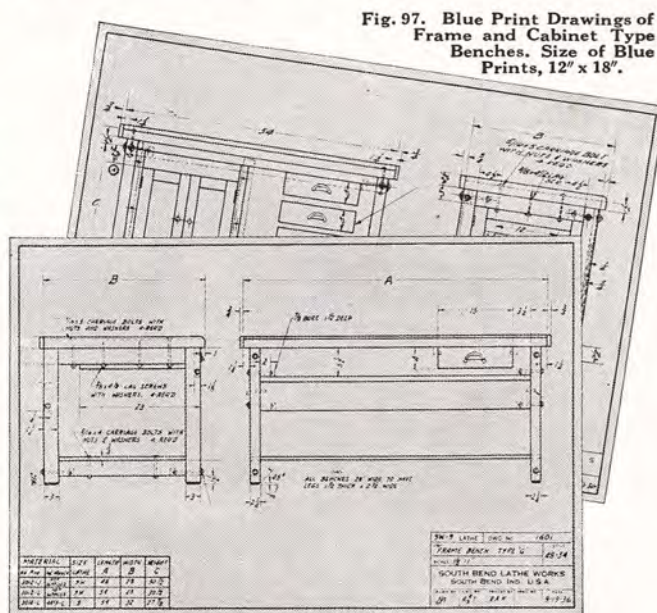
Blue Print Drawings of Frame and Cabinet Type Benches. Size of Blue Prints, 12" x 18".
